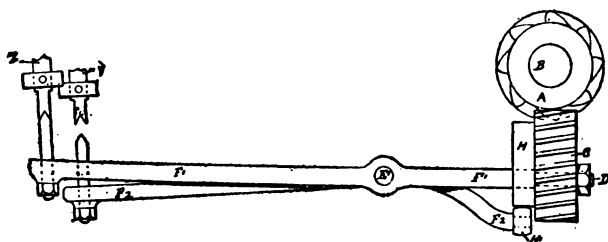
Slightly Modified Form of Roots' Reversible Valve-opening Mechanism (Side View).
